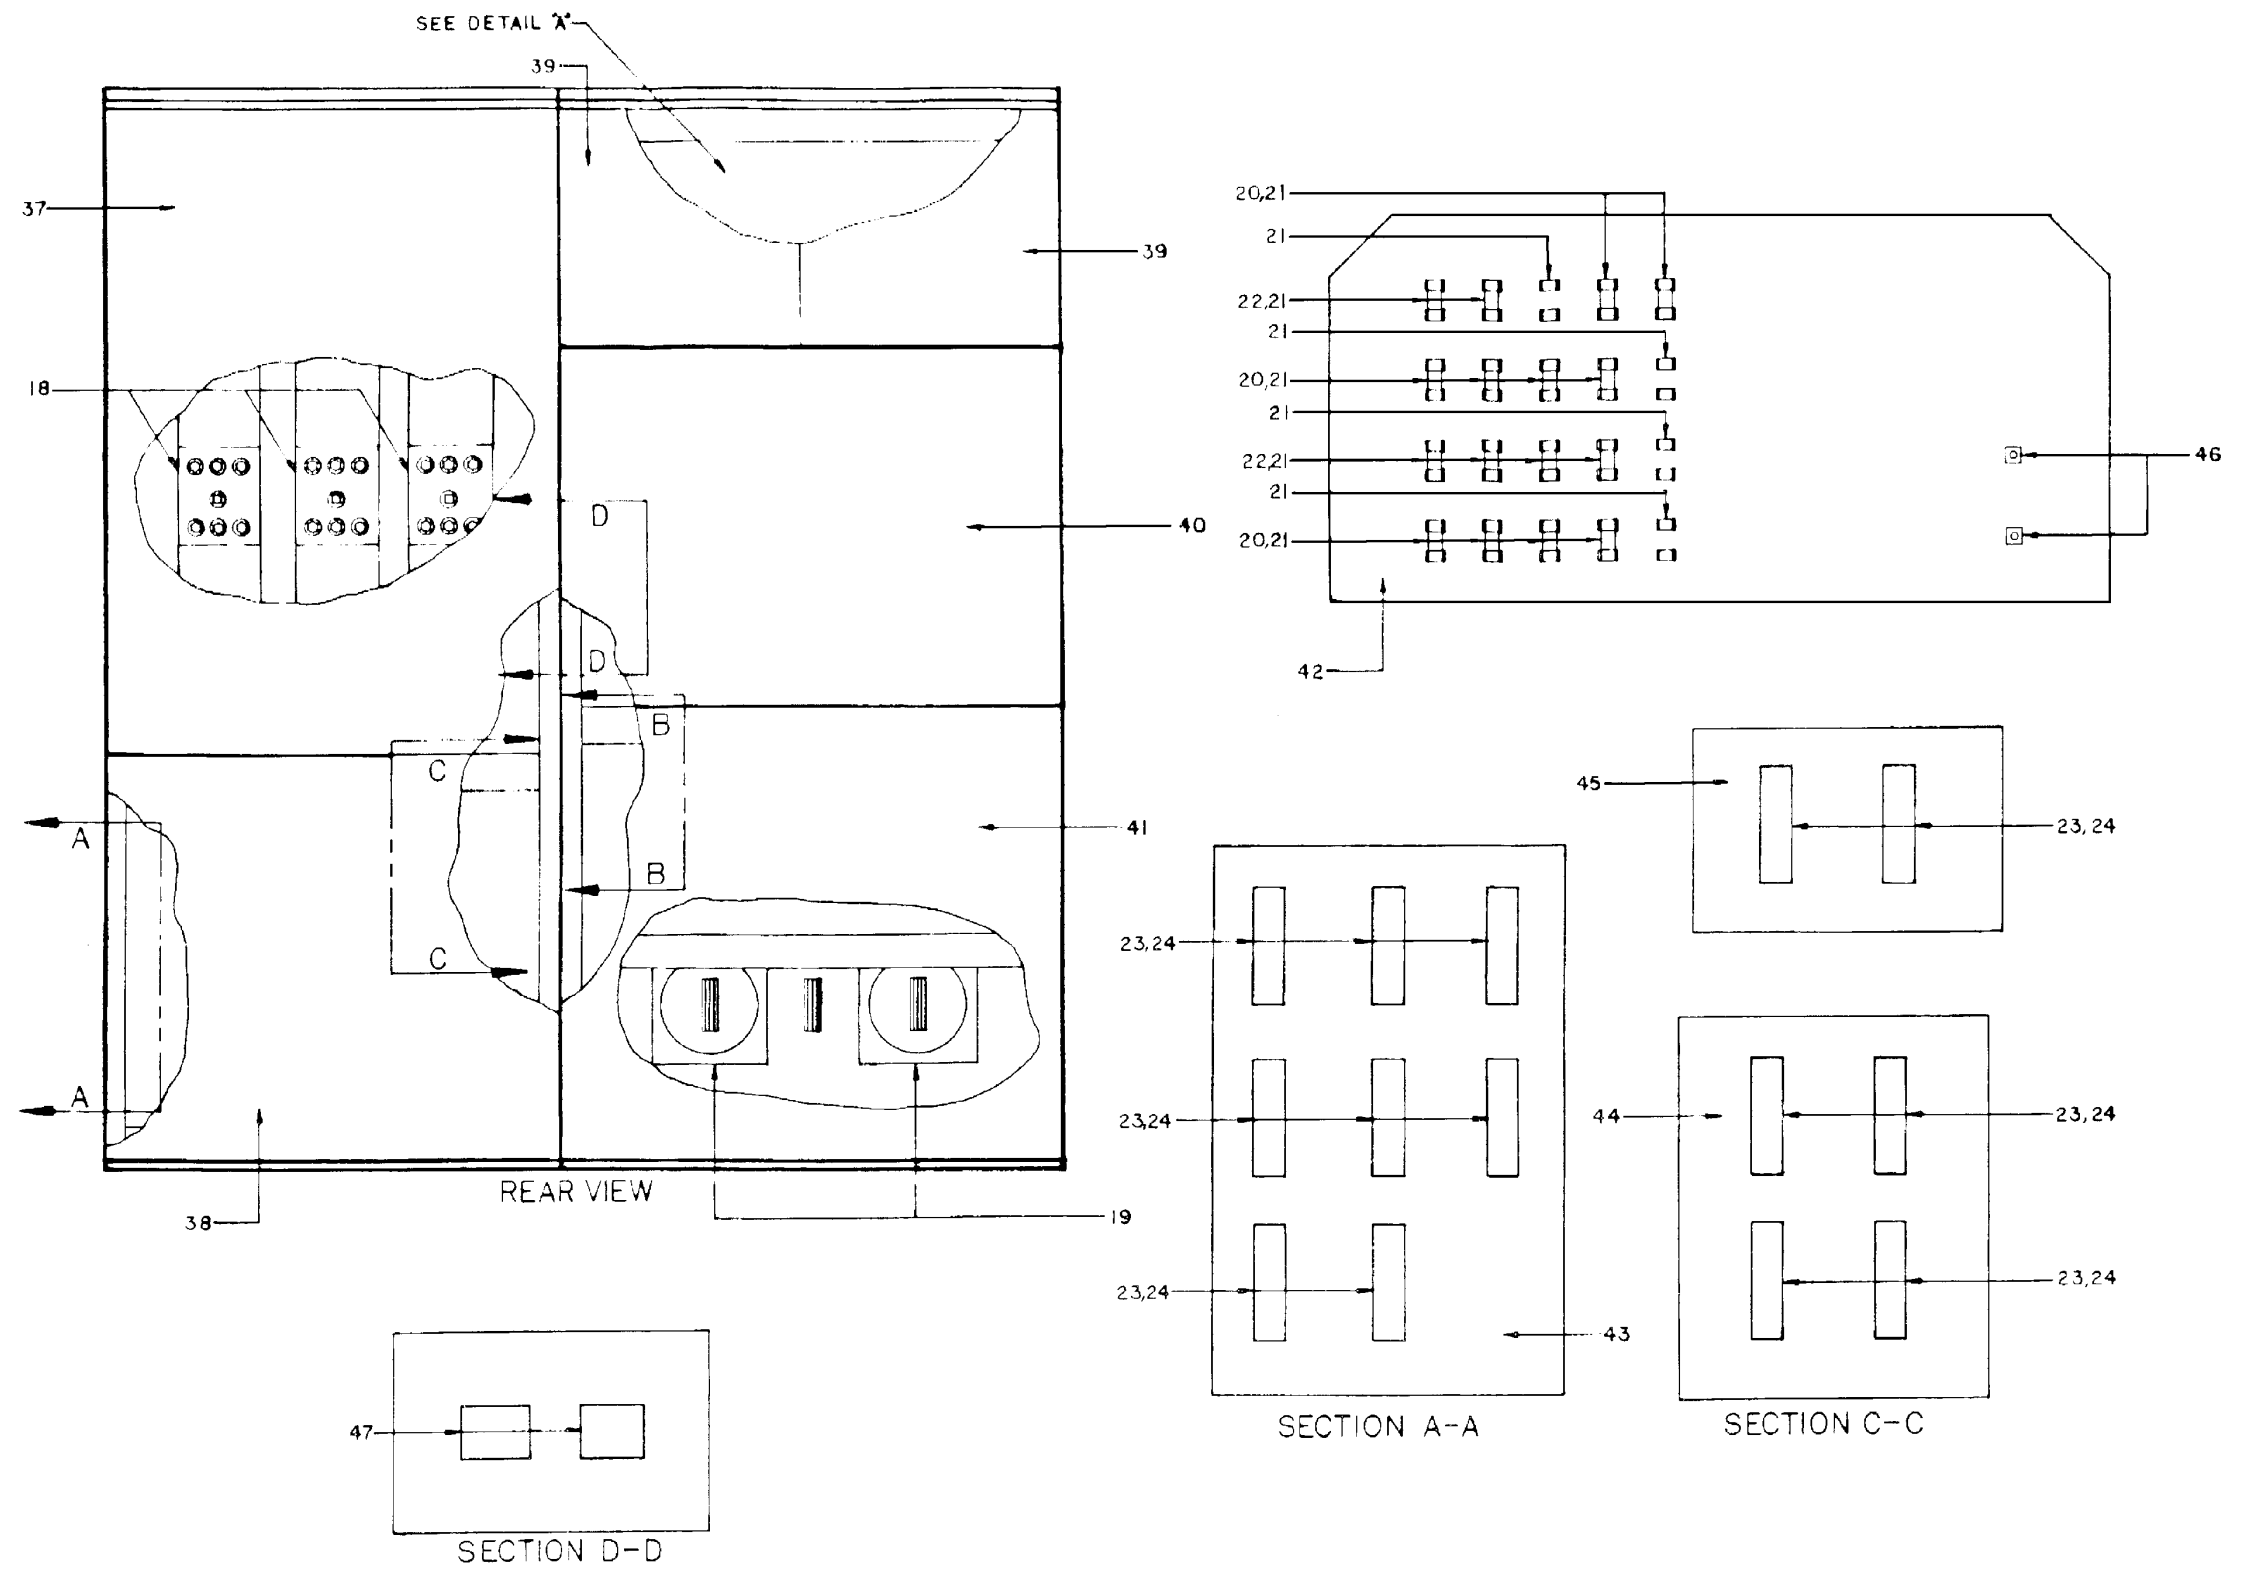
3SC Switchboard Assembly (Sheet 2 of 2)
